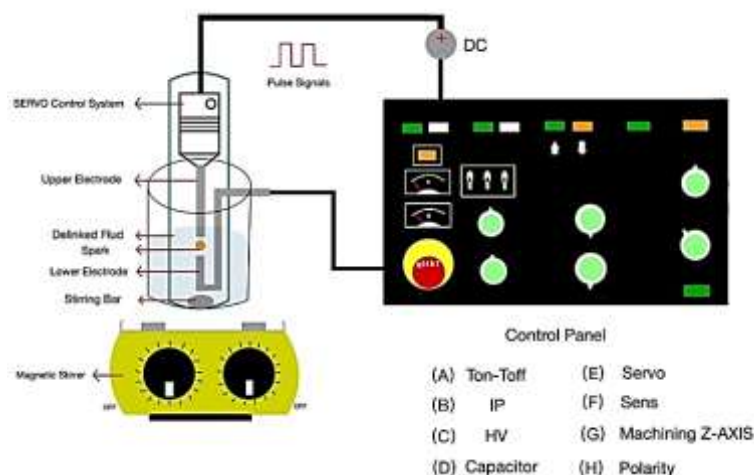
Schematic Diagram of Electric Discharge Machining (EDM)
